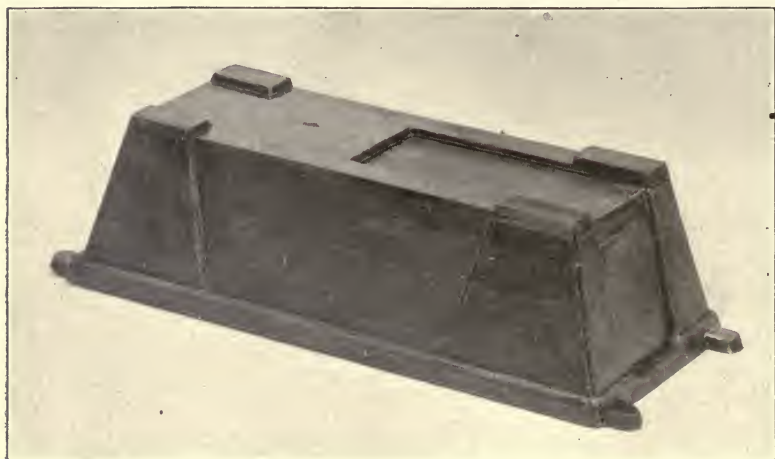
BED PLATE PATTERN WITH SUPPORT IN POSITION FOR MOULDING.
